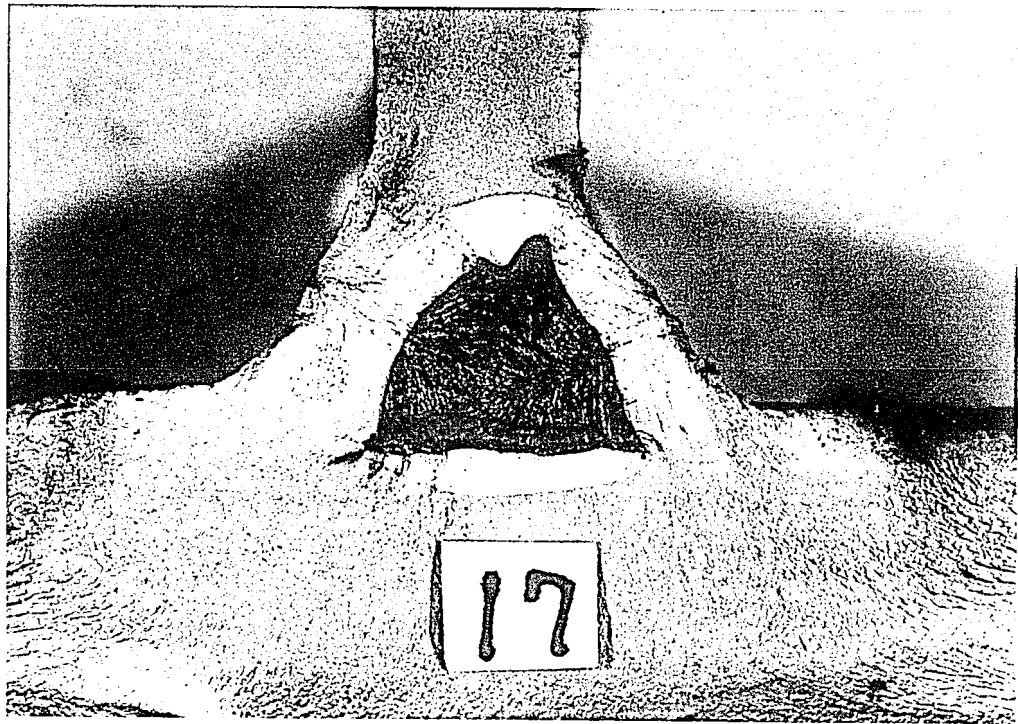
Typical Hydrogen Crack Observed on Fatigue Crack Surface at Intersection of Longitudinal Fillet Welds and Transverse Groove Weld.
